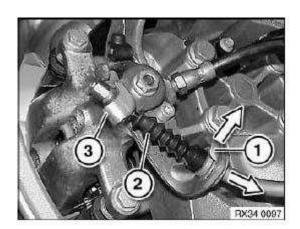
Identifying Parking Brake Bowden Cable And Locking Clip Courtesy of BMW OF NORTH AMERICA, INC.
